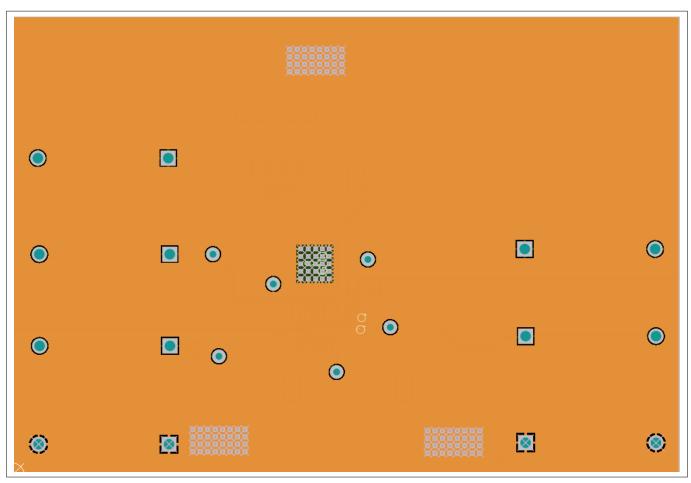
Bottom layer TLS850F3TUVxx demoboard
